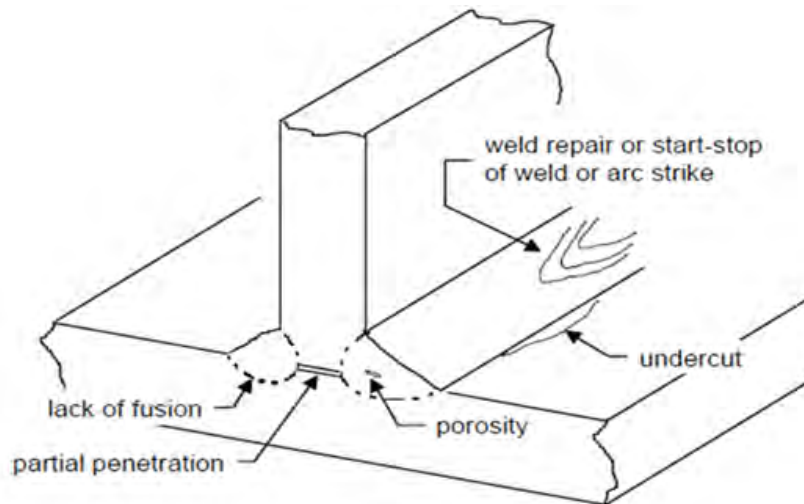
Flaws in a fillet-welded detail (Fisher et al. 1998)
